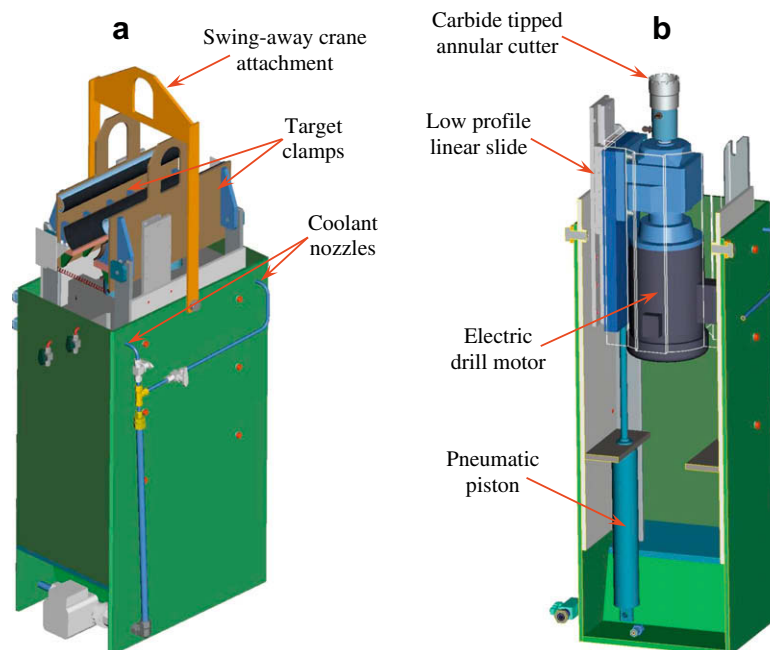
(a) External and (b) internal view of dual-cutter drilling unit.
